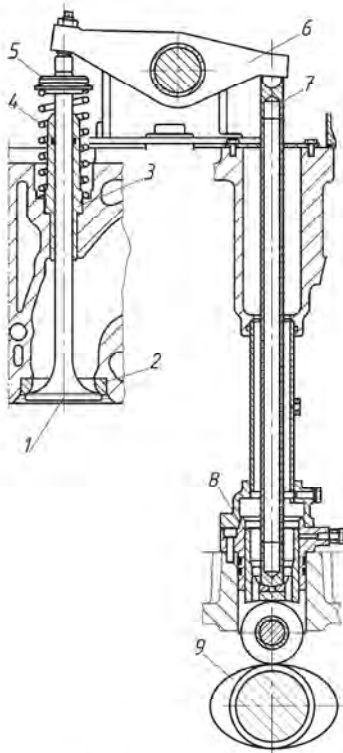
Valve-type gas distribution mechanism of diesel engine TBD 645, Deutz MWM: 1 – valve; 2 – valve seat; 3 – guide sleeve; 4 – spring; 5 – upper valve plate; 6 – double-arm lever; 7 – pusher rod; 8 – pusher; 9 – camshaft (adapted from [7])
